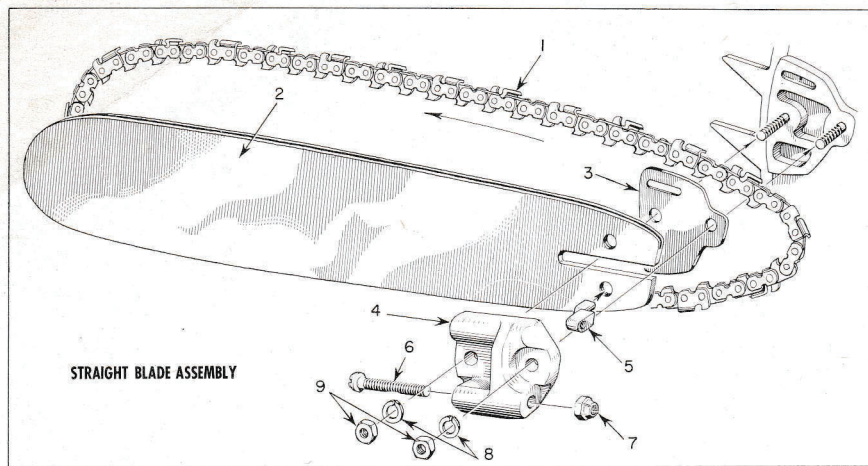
SAW PARTS AND PLUNGE-CUT BOW ATTACHMENTS
